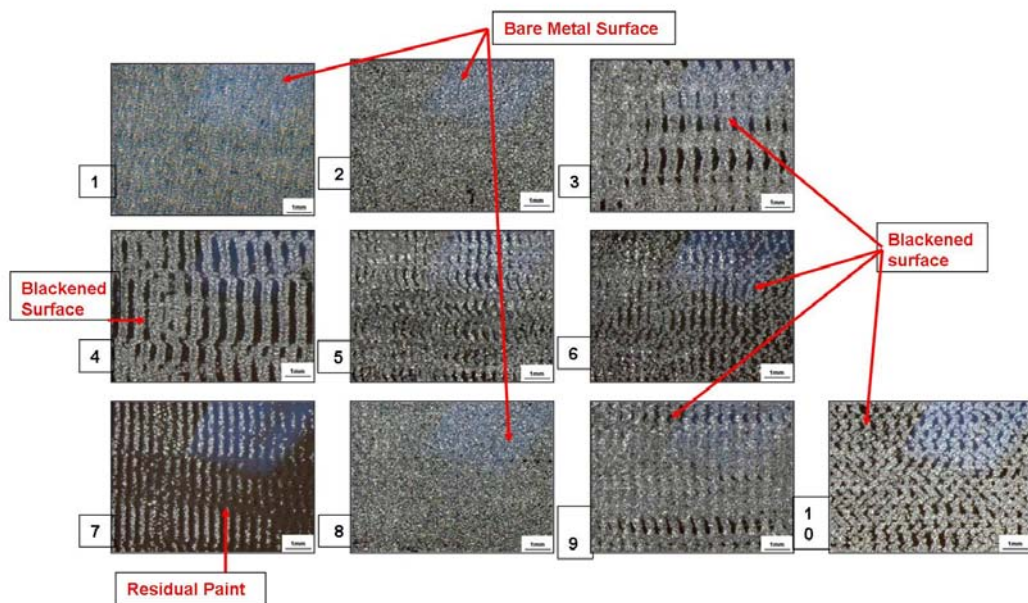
Photographs of samples with different surface appearance produced in processing parameter trials for Nd:YAG laser primer removal.
